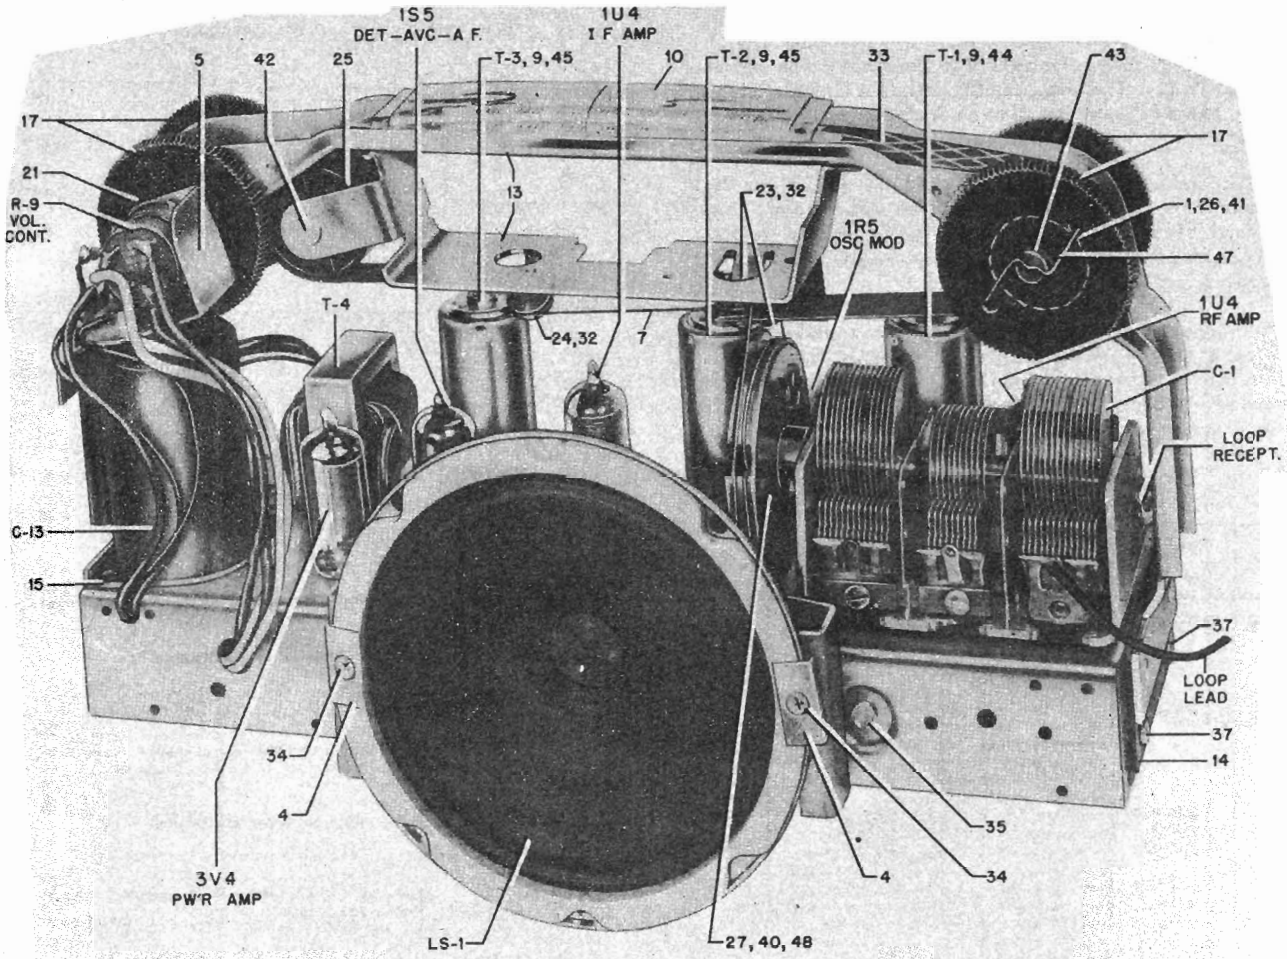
PARTS LOCATIONS - CHASSIS TOP & BOTTOM
